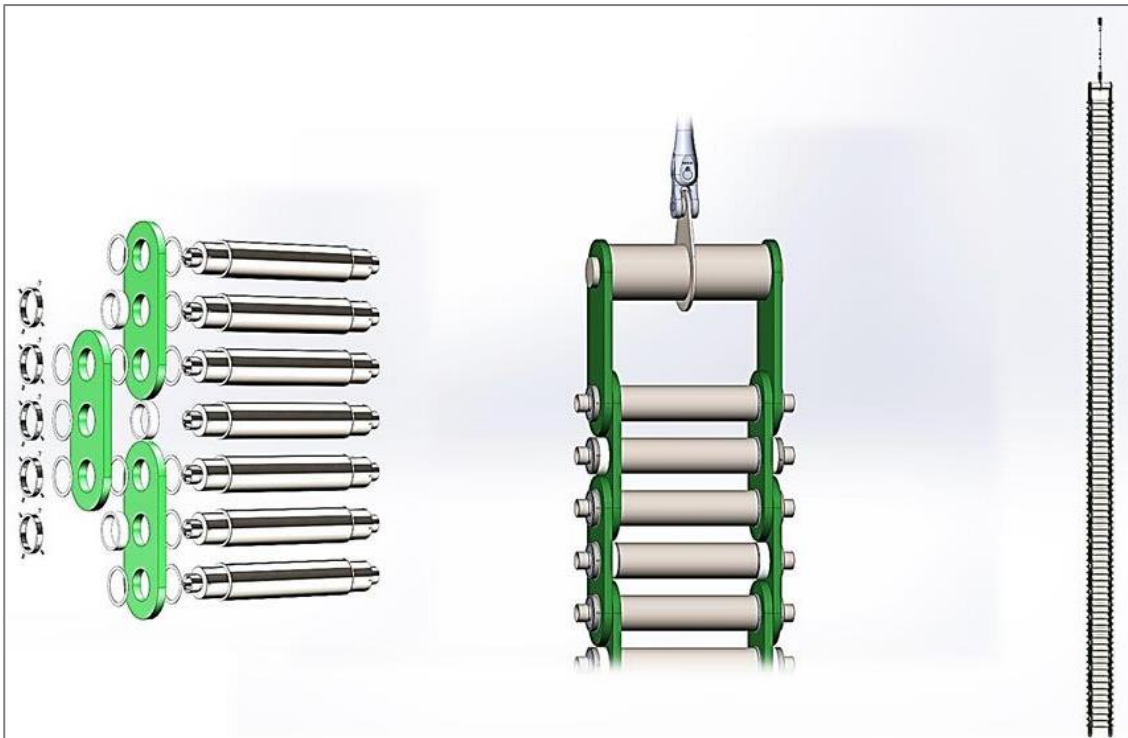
Exploded & Assembled Views of a Hanging Column. Courtesy Technodyne Ltd
